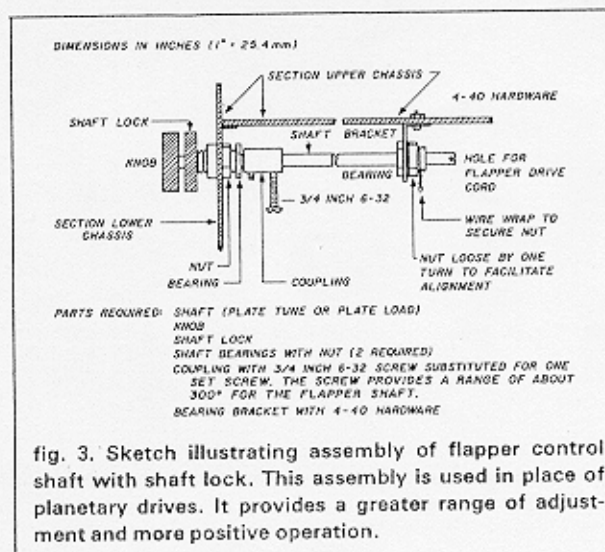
Sketch illustrating assembly of flapper control shaft with shaft lock. This assembly is used in place of planetary drives. It provides a greater range of adjustment and more positive operation.
